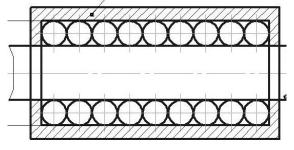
Concept of bearing design with a movable spiral-cylindrical spring
